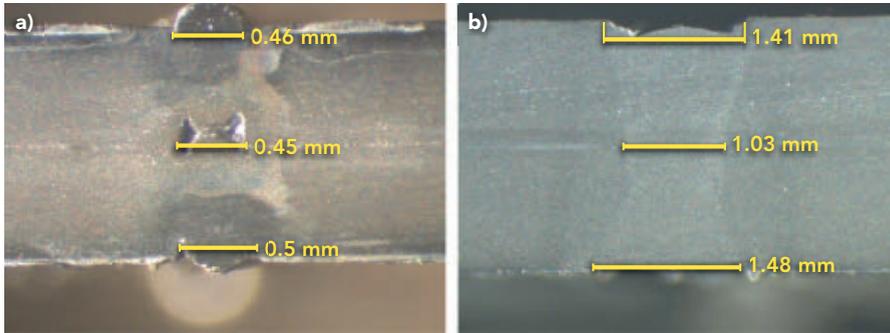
Cross-sections show the weld seam for 1.25-mm-thick zinc-coated steel processed using a fiber laser without a gap between the sheet and at a feed rate of 3.3 m/min, where conventional laser focusing creates a seam with voids (a) and the FL-ARM creates a weld seam with excellent uniformity and no porosity (b).
